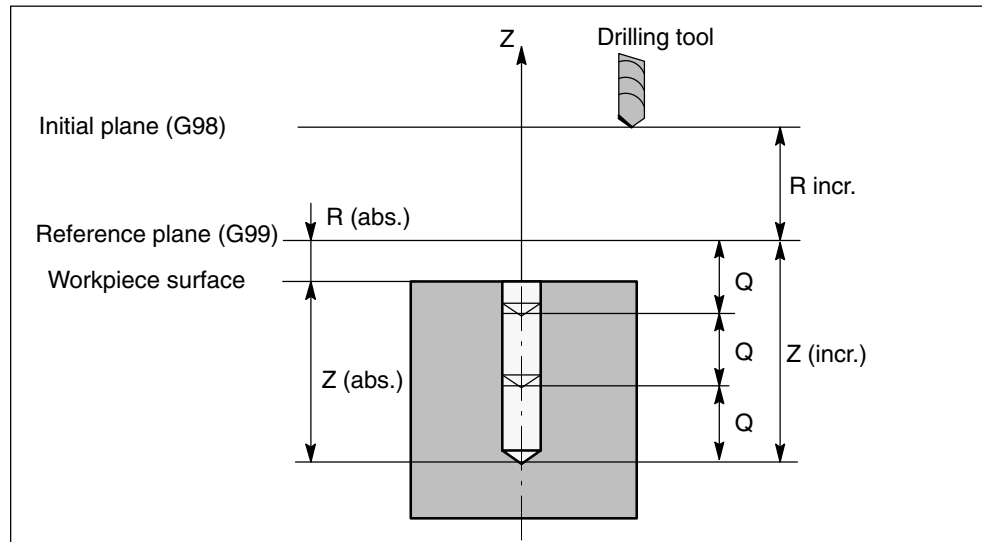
Example of deep hole drilling cycle G83 with defined plane G17
